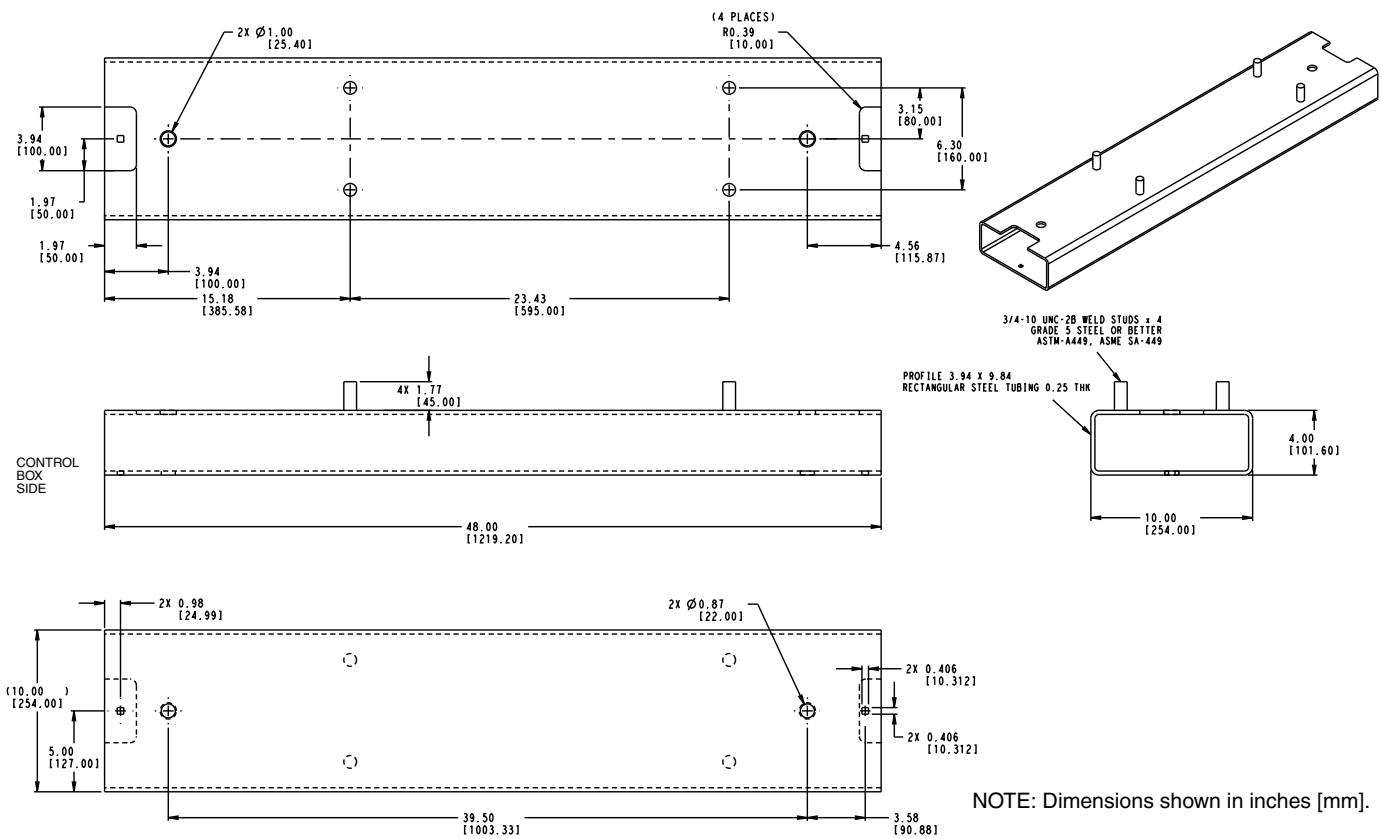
30XW225-400 Unit Mounting Feet Dimensions
